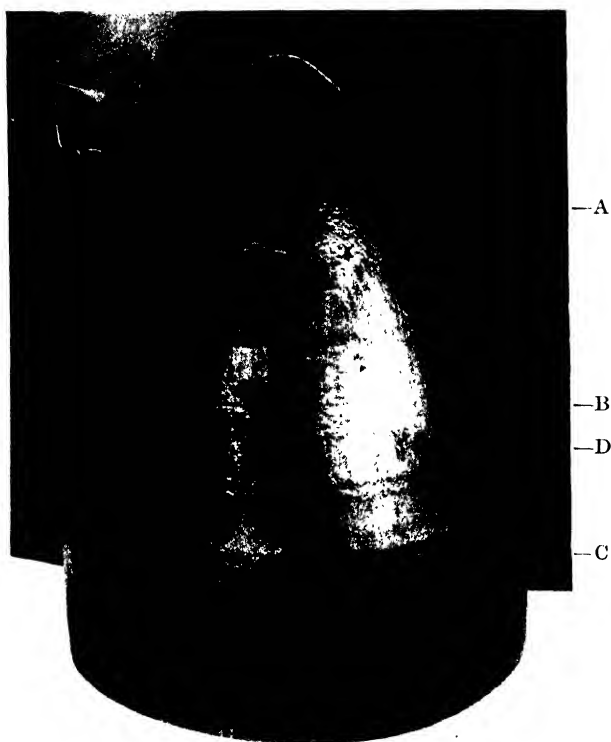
Combination of defects in a pointed shell deep drawn to a depth of 12 inches from steel sheet 0.035 inch thick. $\times \frac{1}{4}$
